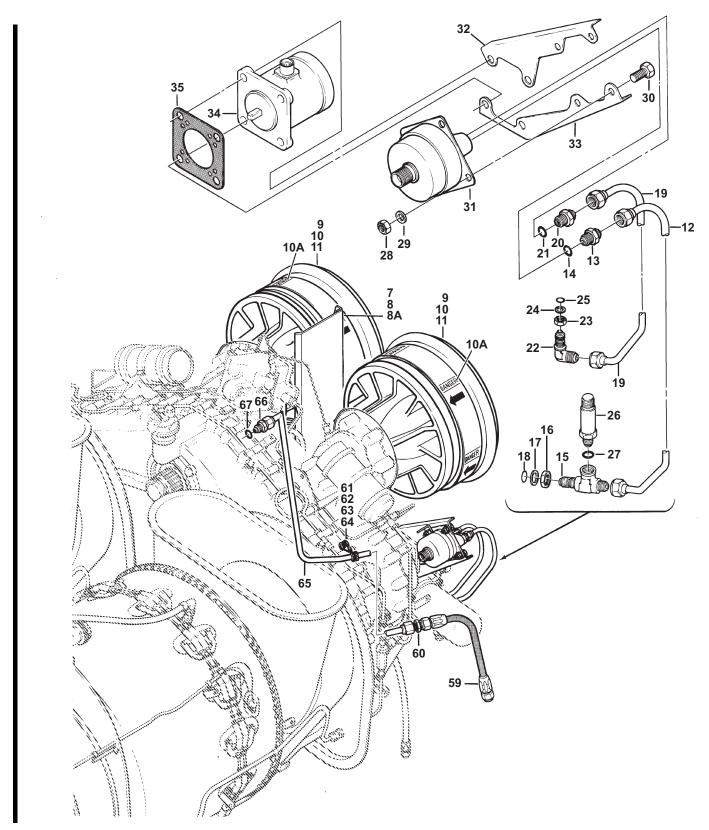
Engine Assembly, Rear (Sheet 1 of 2)
